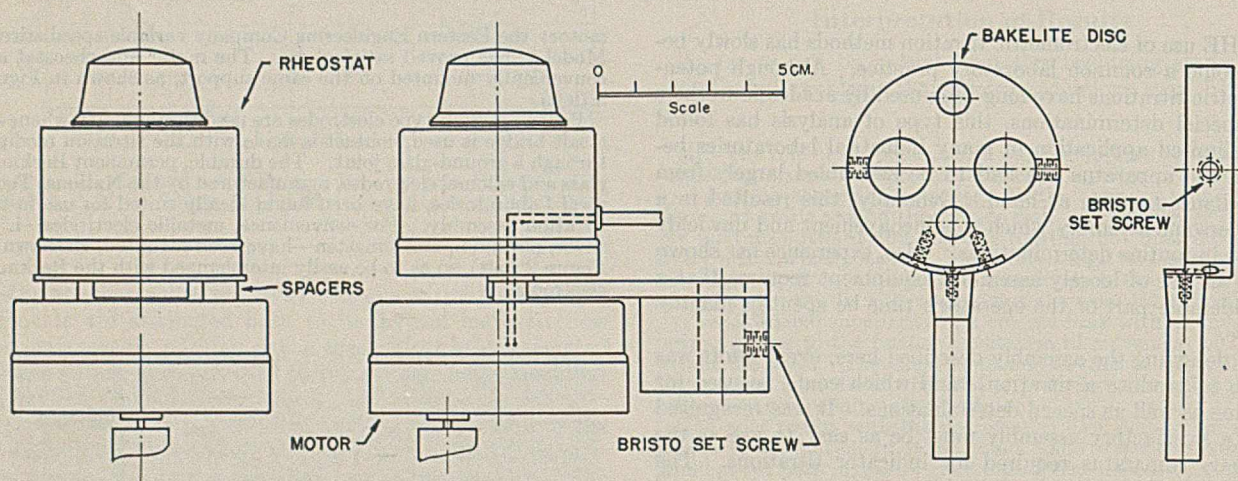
MOTOR AND RHEOSTAT MOUNTING (left) AND COMBINED ELECTRODE HOLDER AND BEAKER COVER (right)
